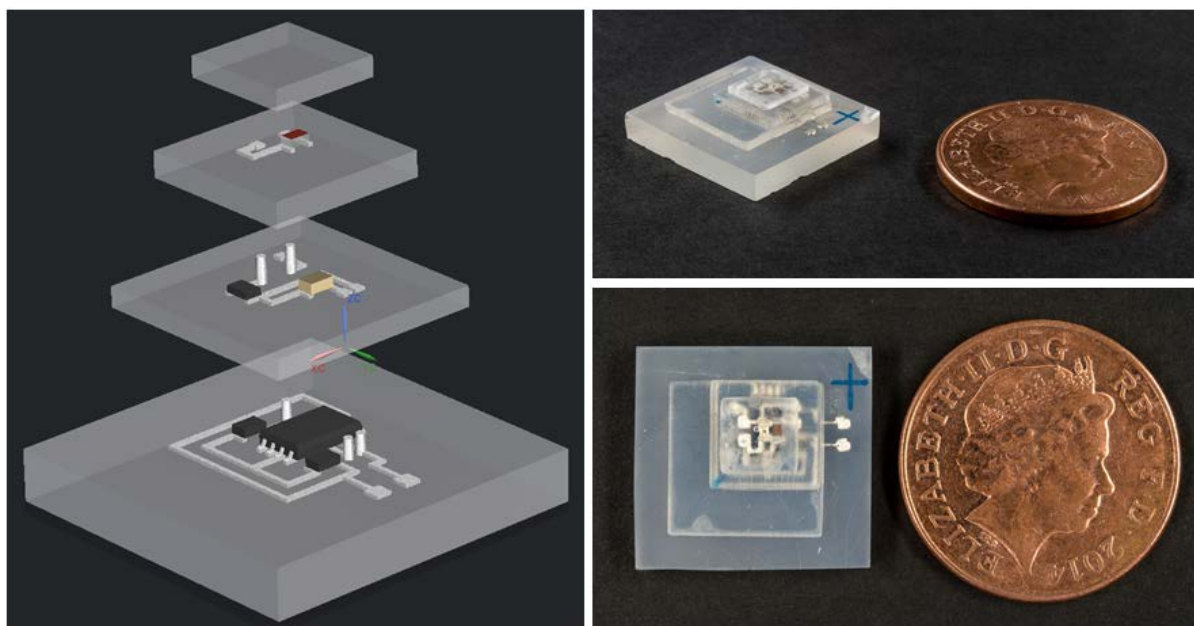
Exploded view, circuit layout and photograph of triple layer, miniaturised 555 timer demonstrator
